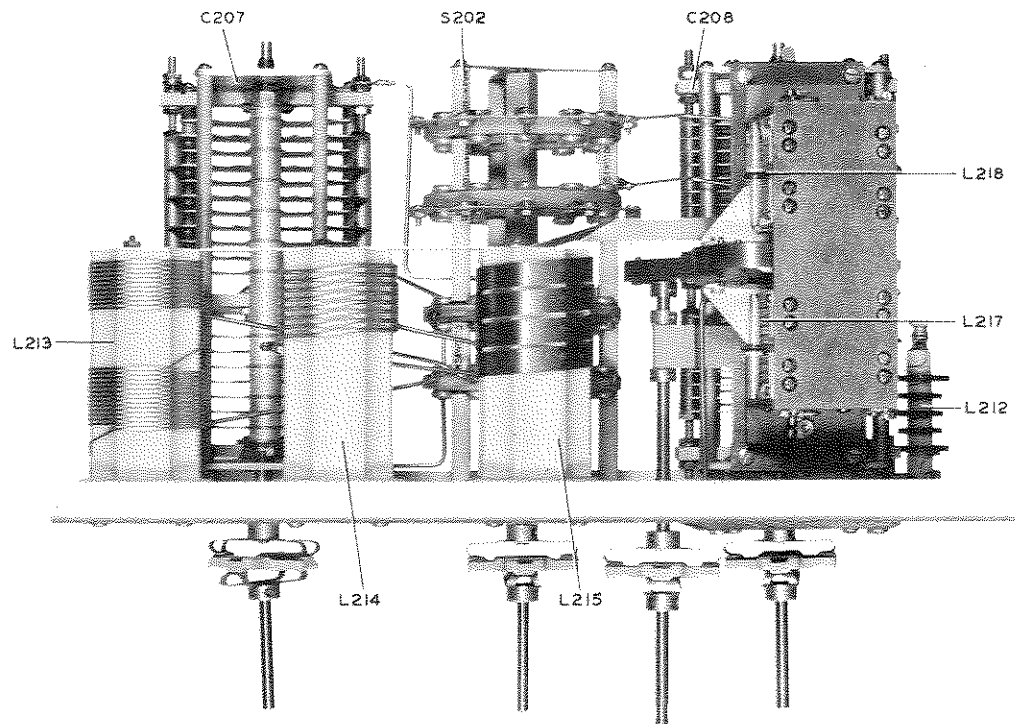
OUTPUT COIL & SWITCH ASSEMBLY, TOP VIEW
